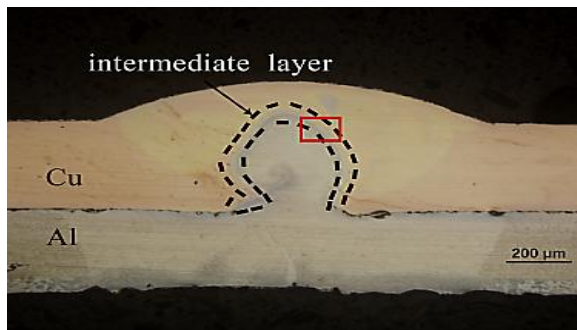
Intermetallic compounds layer of Al/Cu laser welding joints
